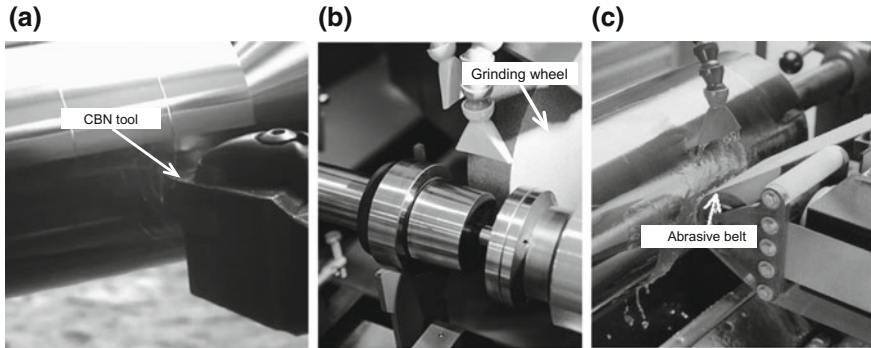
Three machining operations performed: CBN hard turning (a), wheel grinding (b) and belt grinding (c)
